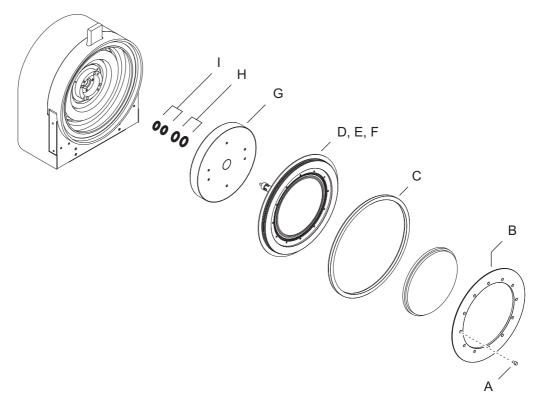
Spare parts: Front of the ARQ 151 6"/8"
